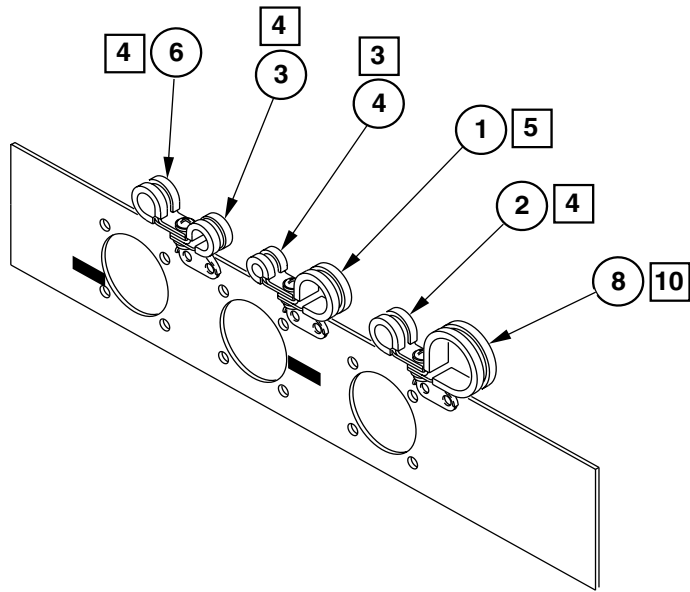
Cabin Overhead Electrical Clamping and Routing (Sheet 4 of 4)
